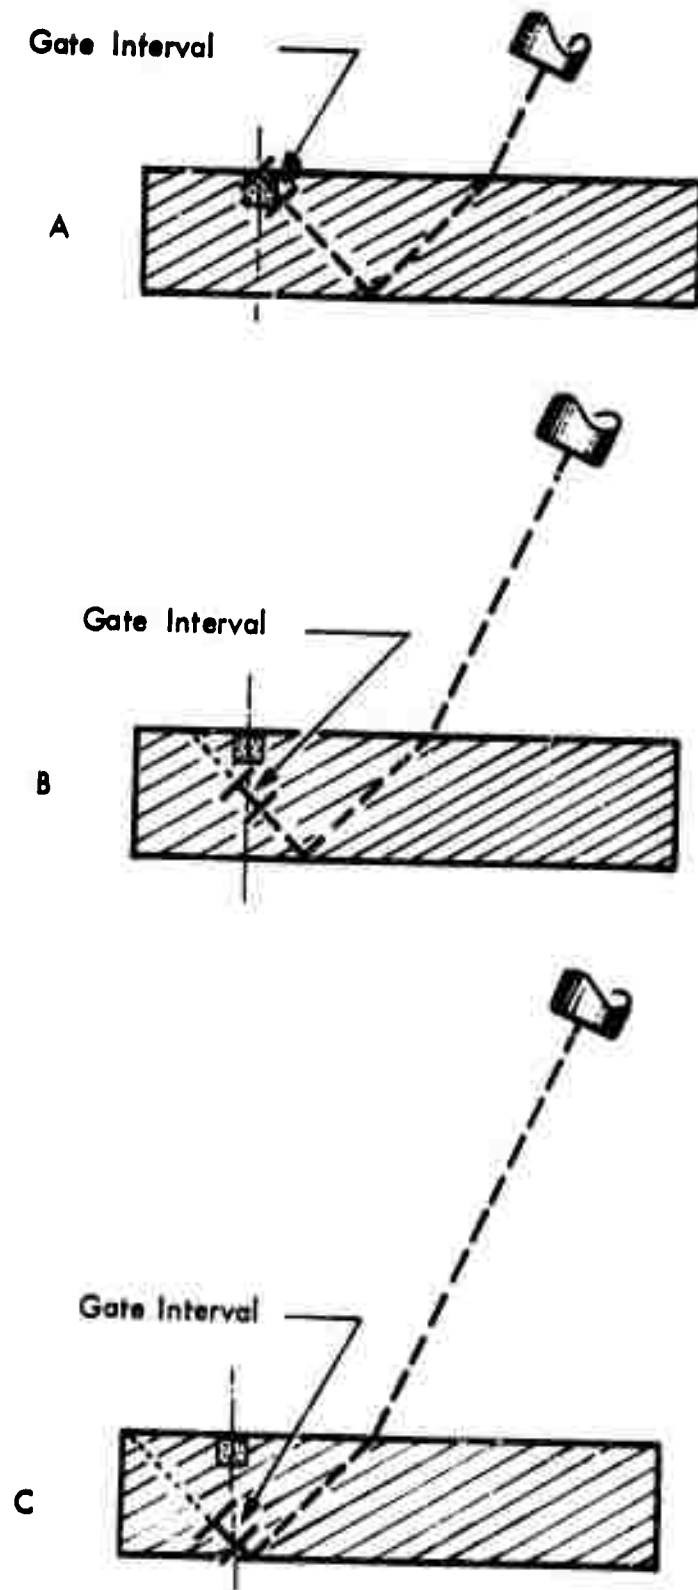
MULTIPLE TRANSDUCER WELD SCAN
